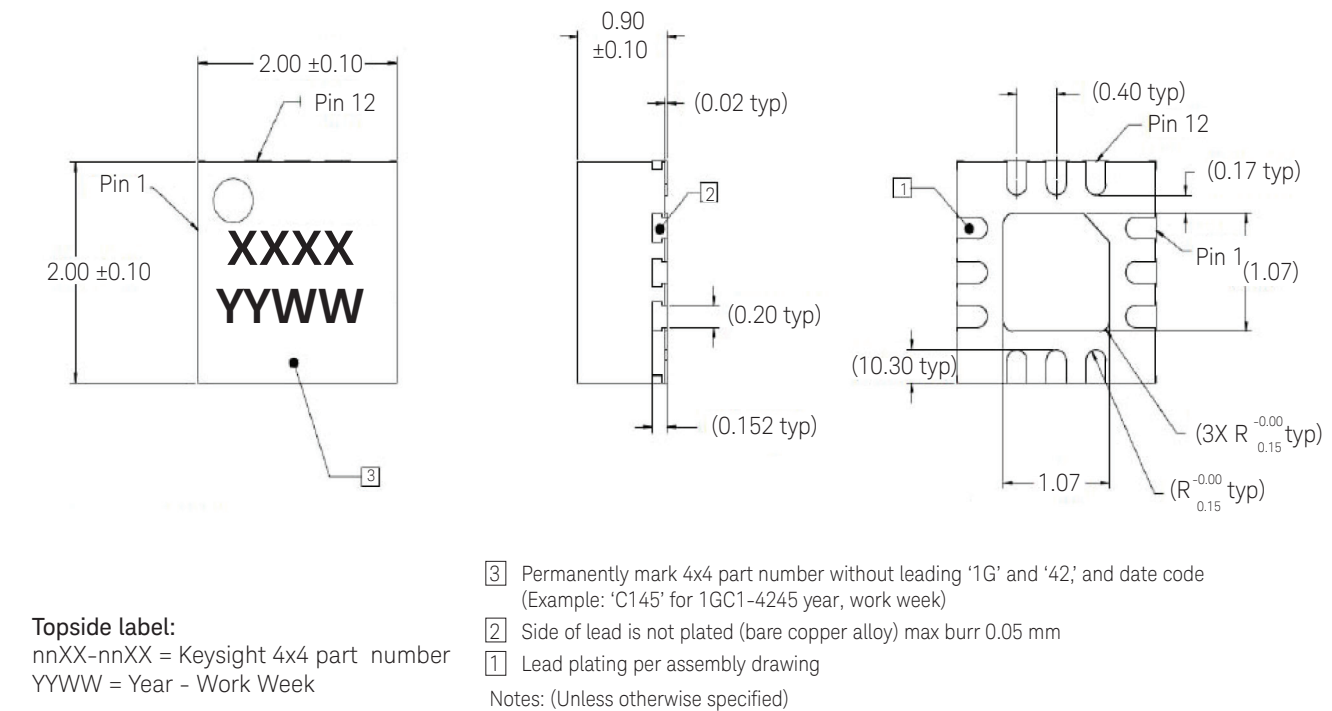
1GG5-4213 dimension drawing (dimensions in mm)
